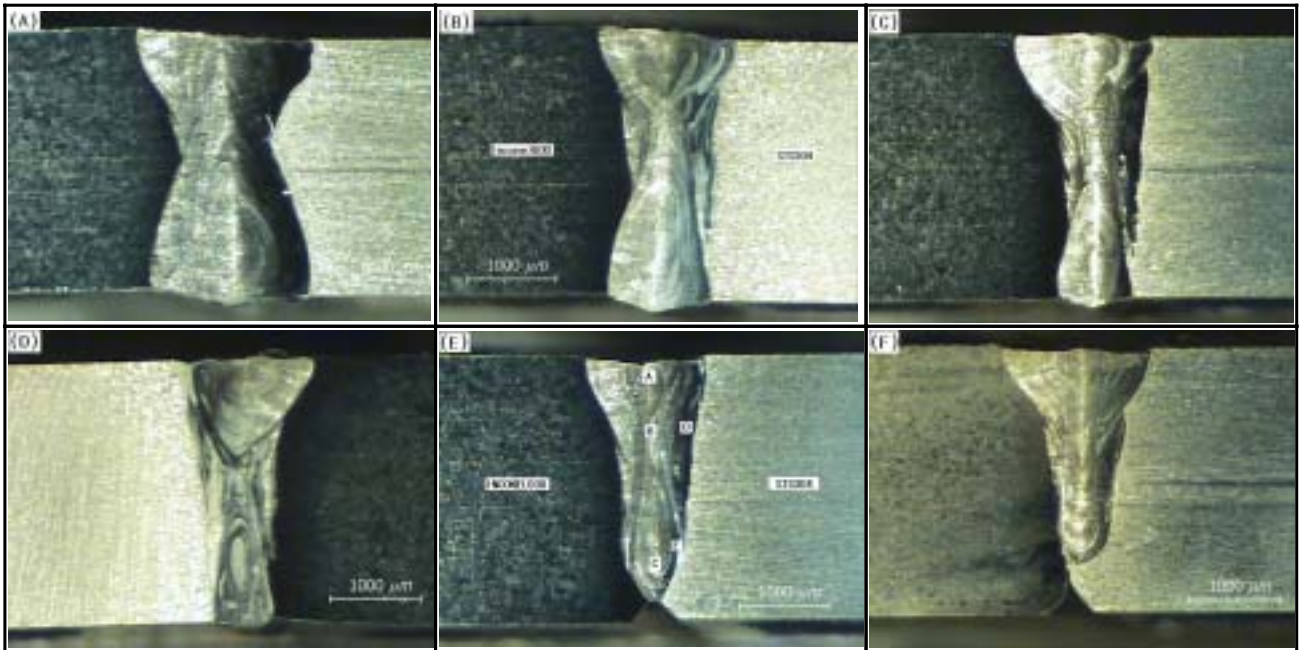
Dissimilar metal Welding of the Cross-section by laser welding speed (Z=-1.0mm, P=1.4kW)
